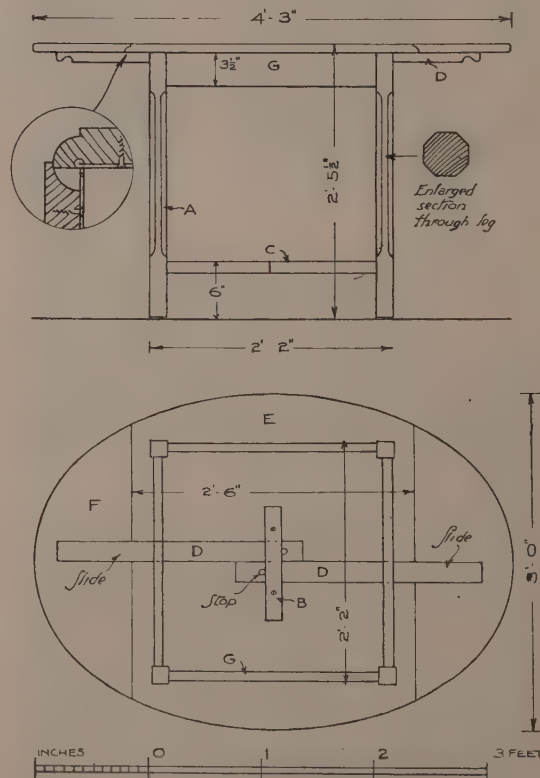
DIMENSIONED ELEVATION AND PLAN,
